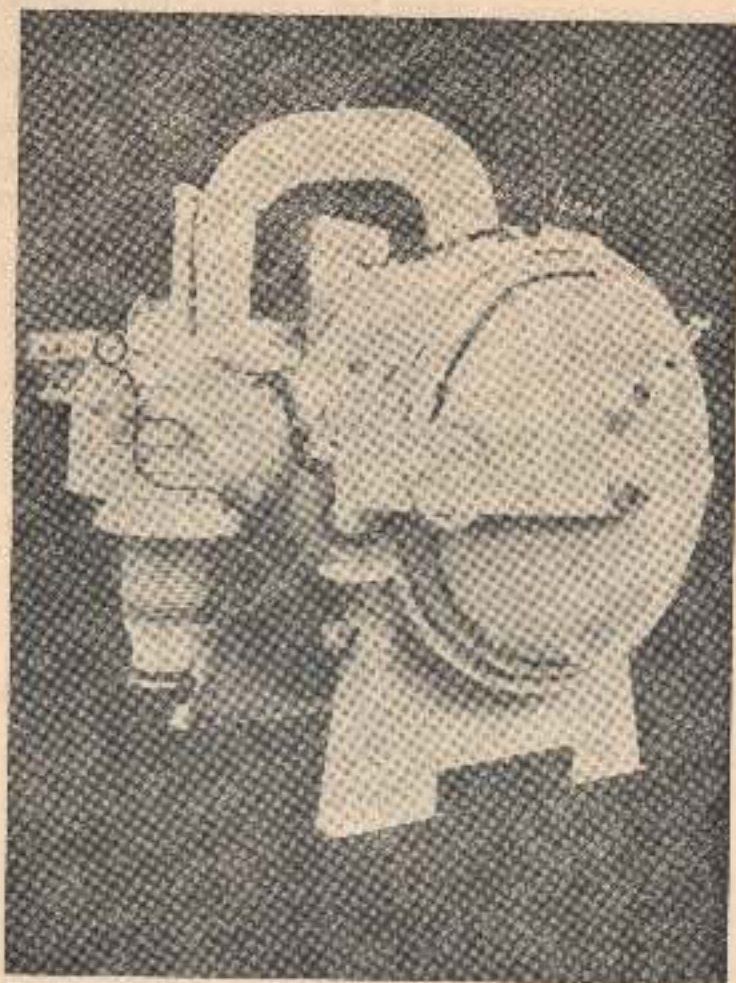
Ipsen single-chamber vacuum furnace with high-pressure gas quenching (Courtesy: Ipsen Industries International, GmbH, W. Germany)
